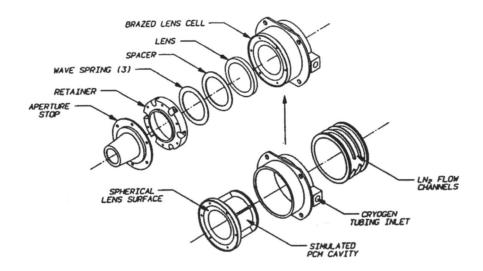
Exploded view of the lens assembly of Fig. 14.30. (From Stubbs and Hsu. 28)
